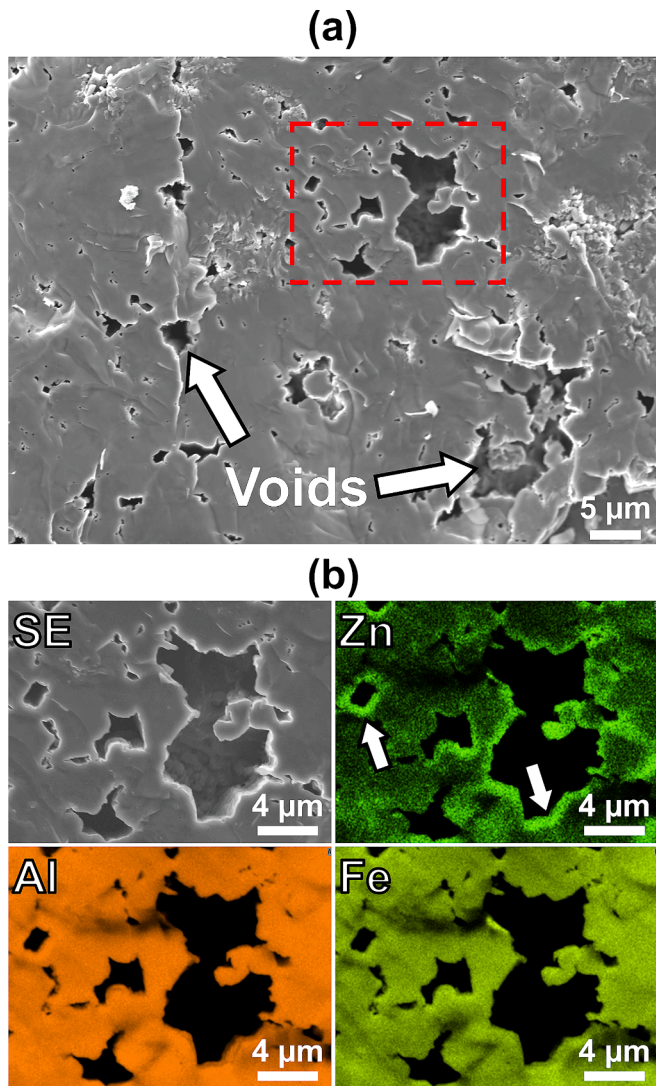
(a) SE image of a fracture surface taken from the steel side of a weld produced using an Al–Zn filler without Ni plating. The white arrows in a indicate the voids formed in the fracture surface. (b) Enlarged SE image and corresponding EDS maps of the area highlighted by the red rectangle in a. The white arrows in Zn maps indicate the Zn enrichment at the periphery of the voids.
